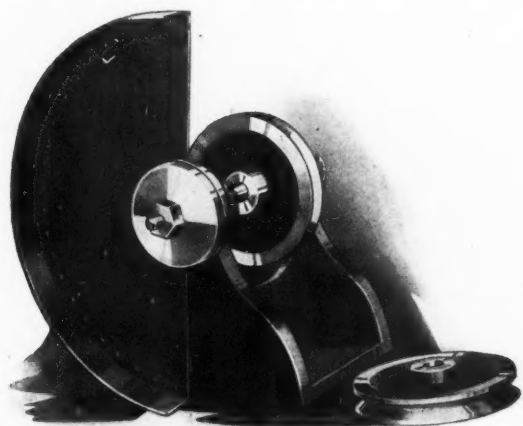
Attachment for "Hartford" Surface Grinder for sharpening Powder Cutter Knives
